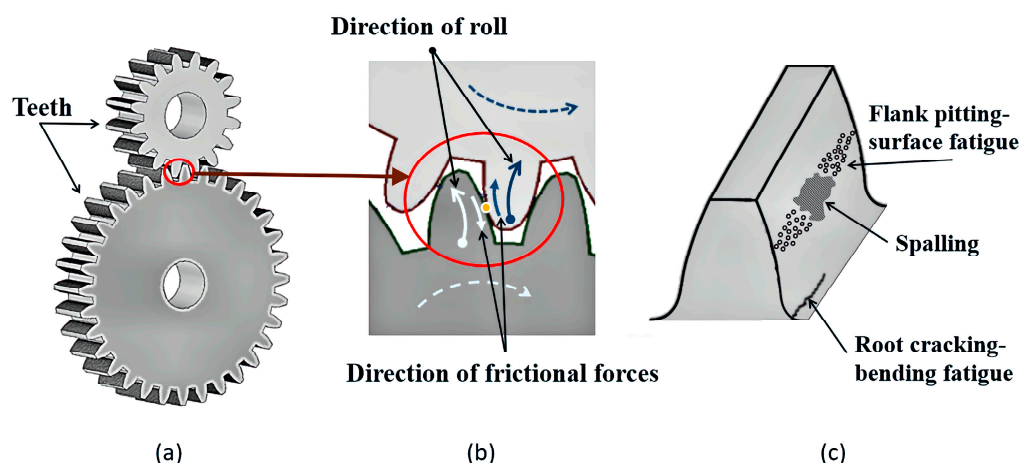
A typical gear drive mechanism: (a) Two gears in mesh; (b) Mechanics of gear tooth engagement (at point of first contact); (c) Gear tooth failures.
